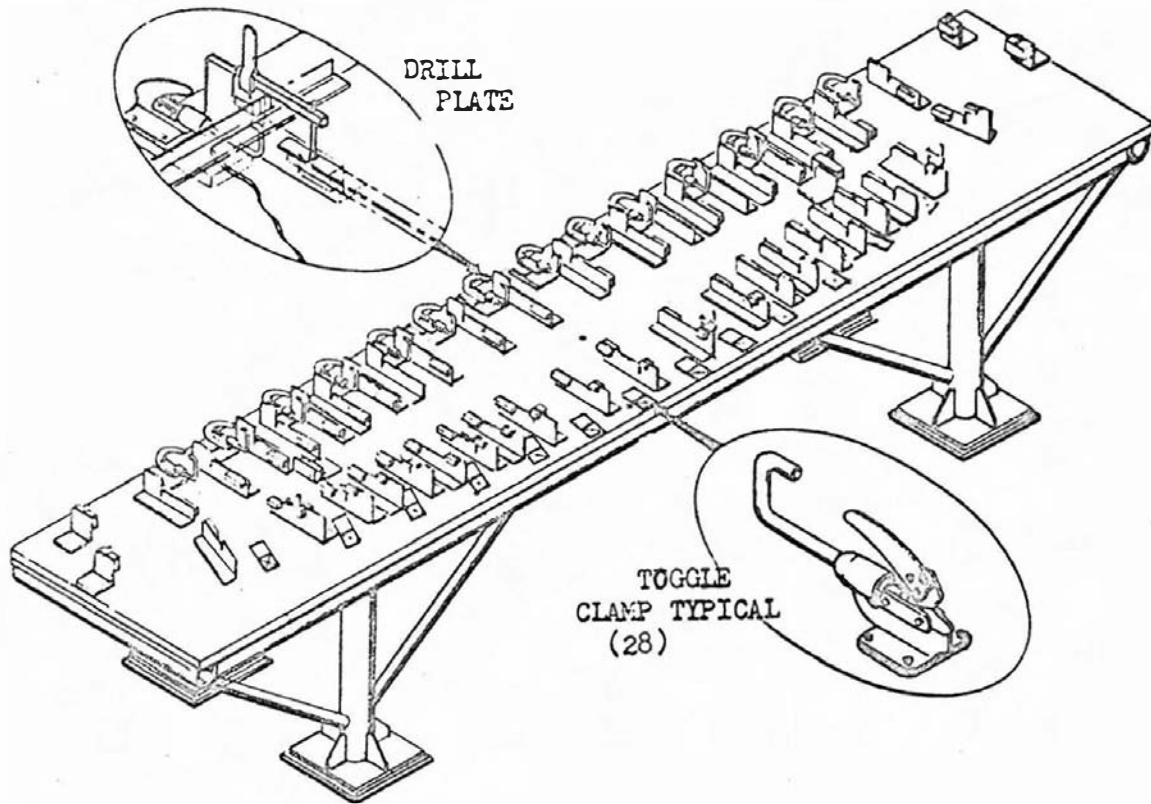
Intermediate Ring Assembly, Assembly Fixture AF-335-19110
